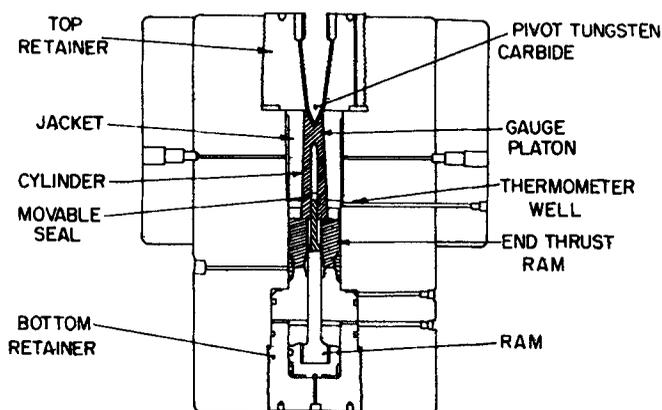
NBS 2.5 GPa controlled clearance piston gauge. 2 mm diameter cemented tungsten carbide gauge piston. Pressure generated by hydraulic ram. Longitudinal support of cylinder from end thrust ram. Radial cylinder support from jacket.
